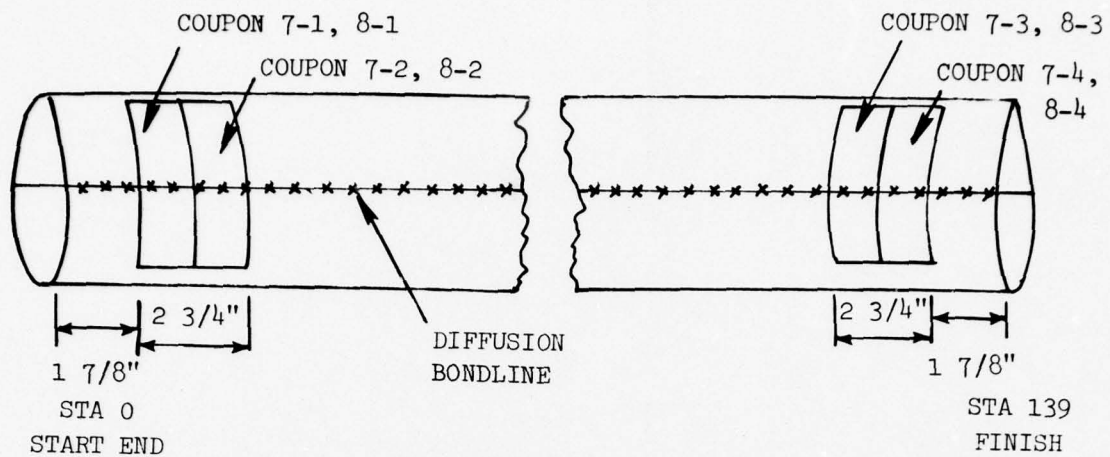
SKETCH OF SPAR TUBES S/N 7 & 8 ILLUSTRATING LOCATION OF BEND TEST COUPONS.
